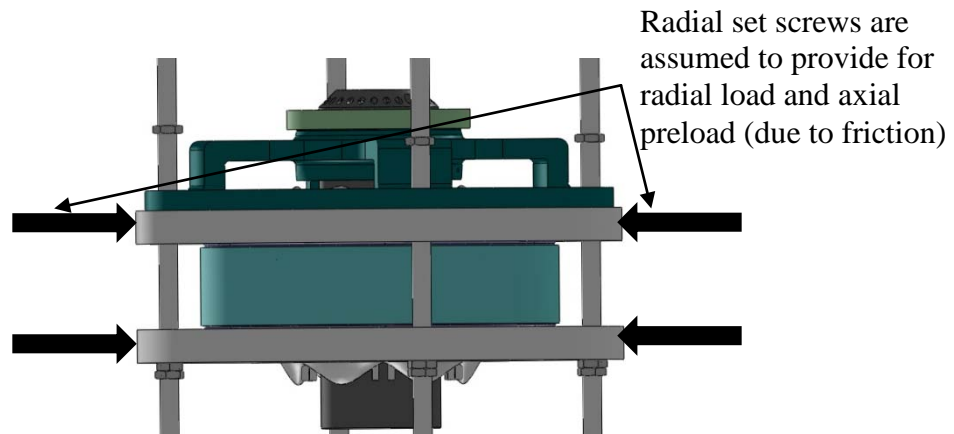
Front view of the assembled bearing with the radial forces (exerted by the radial set screws)
